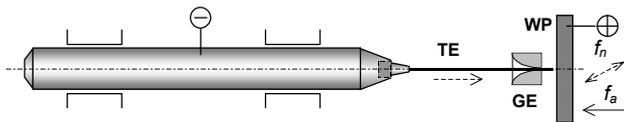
Machining idea of microholes with long fibre electrode: TE - tool electrode, WP – workpiece, GE – guide-eye
